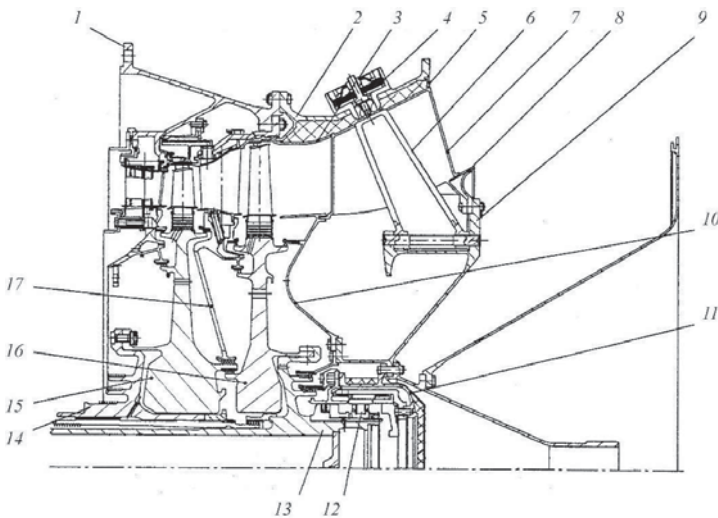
High and low pressure turbines of the UGT25000 engine [12]:
